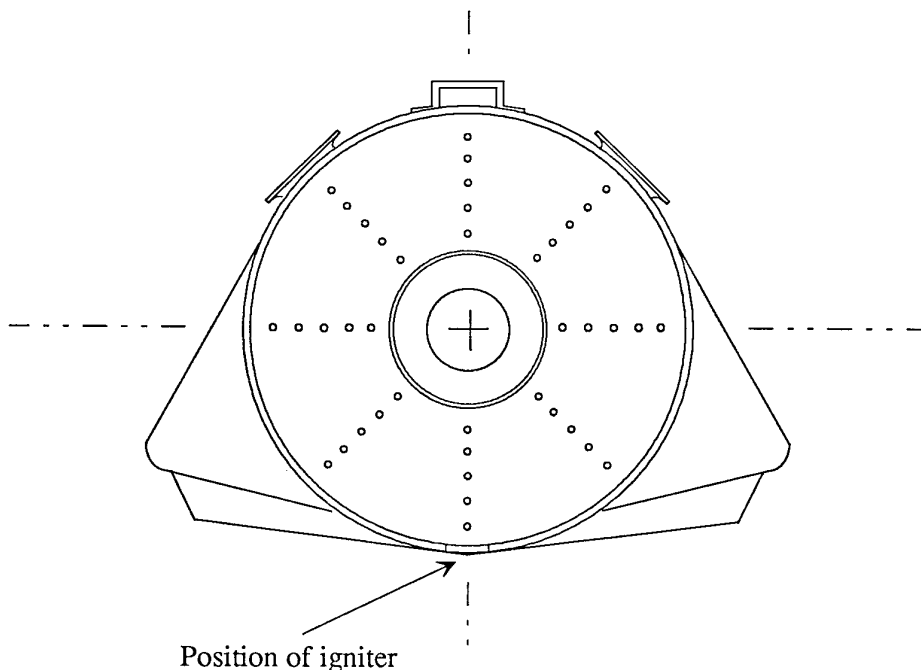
End View of a Combustor Liner Showing Position of Dummy Igniter
